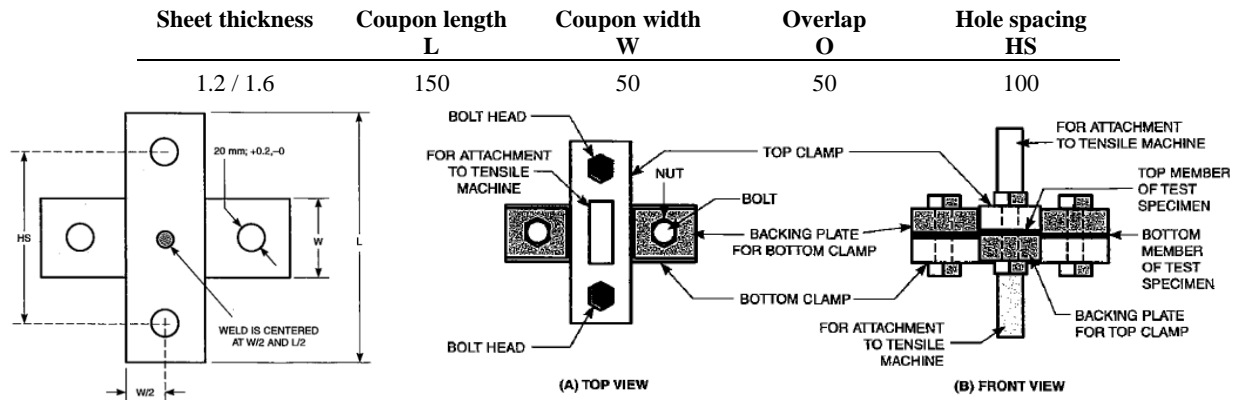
Cross tension assembly geometry and fixture schematic. [36]
